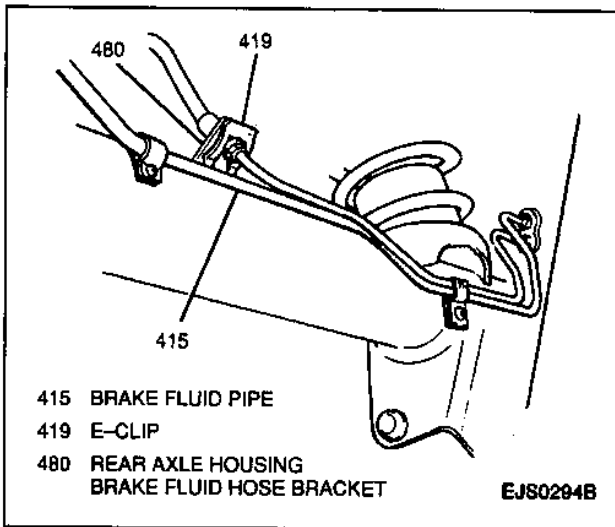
E-Clip and Brake Fluid Pipe Clamp Screws
